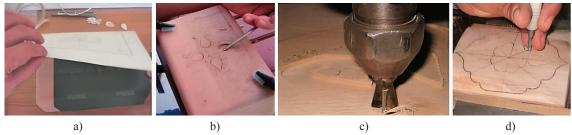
Traditional wood surface decoration techniques: a) manual pattern copying stage, b) hand carving stage, c) hand or CNC router Machine engraving stage, d) filigree (wire inlay) engraving stage
